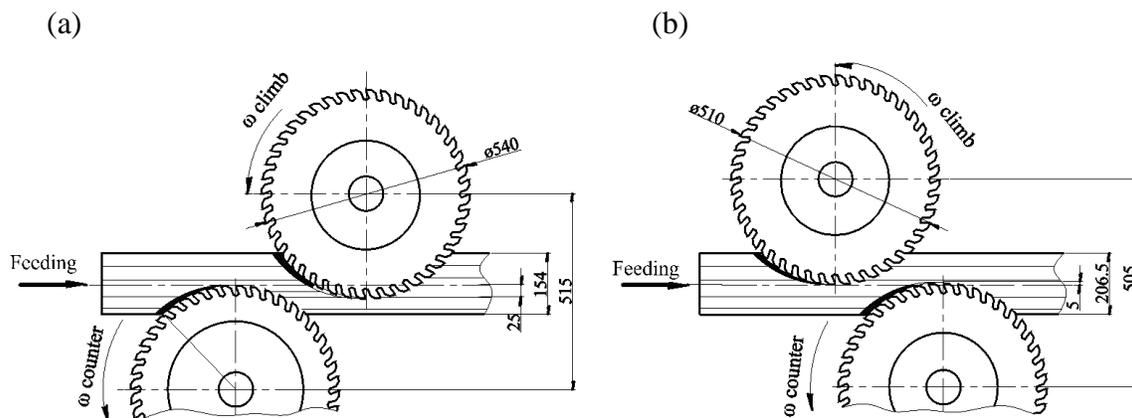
Cutting geometry in climb-sawing and counter-sawing: (a) sawmill A, (b) sawmill B
